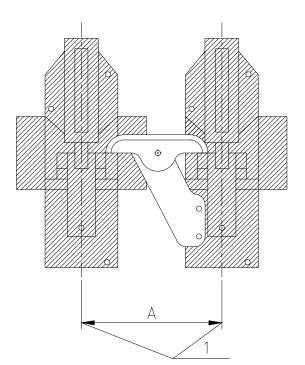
Overall dimensions of contactors KTPV 600-T with interlocking contacts, mm. 1 – vertical mounting axis; 2 – horizontal mounting axis
